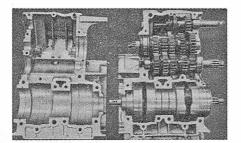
Gears and shafts should stay in place in the top half of crankcase when the lower half is lifted off.
